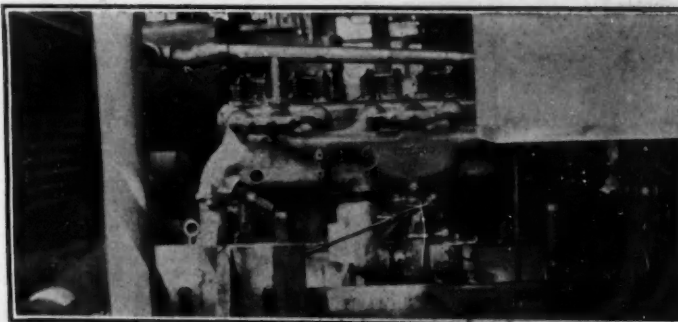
ONE TYPE OF CONNECTION TRIED BETWEEN THE CRANKCASE AND THE CARBURETOR
